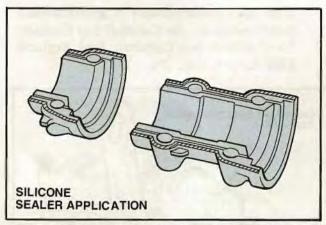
No. 1 Camshaft Bearing Caps Silicone Sealer Application Points
